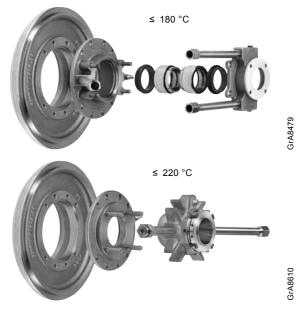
Back-to-back seal arrangement as standard seal or as cartridge seal
